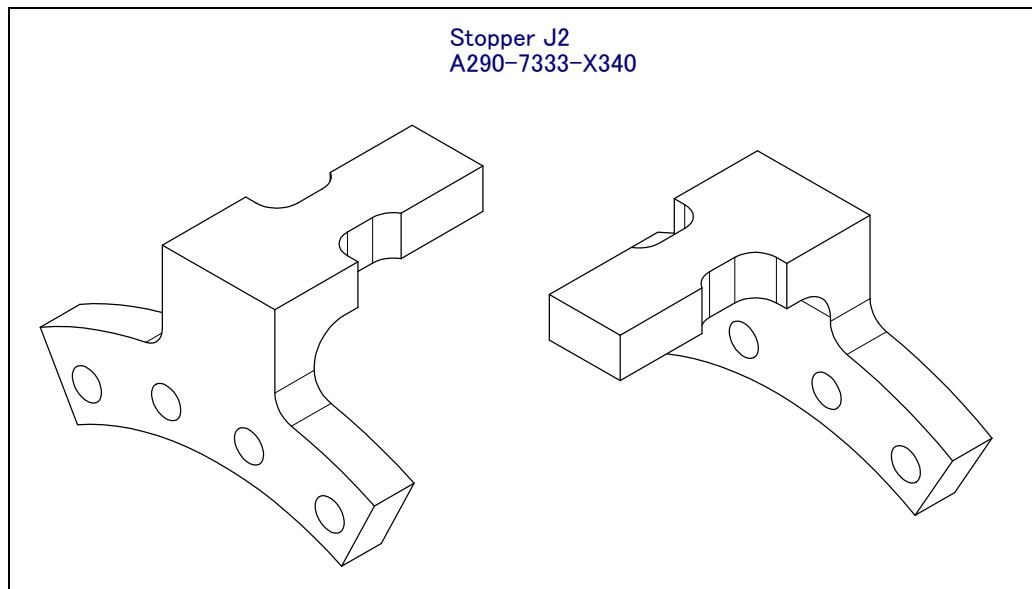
(h) J2-axis adjustable mechanical stopper (option)
